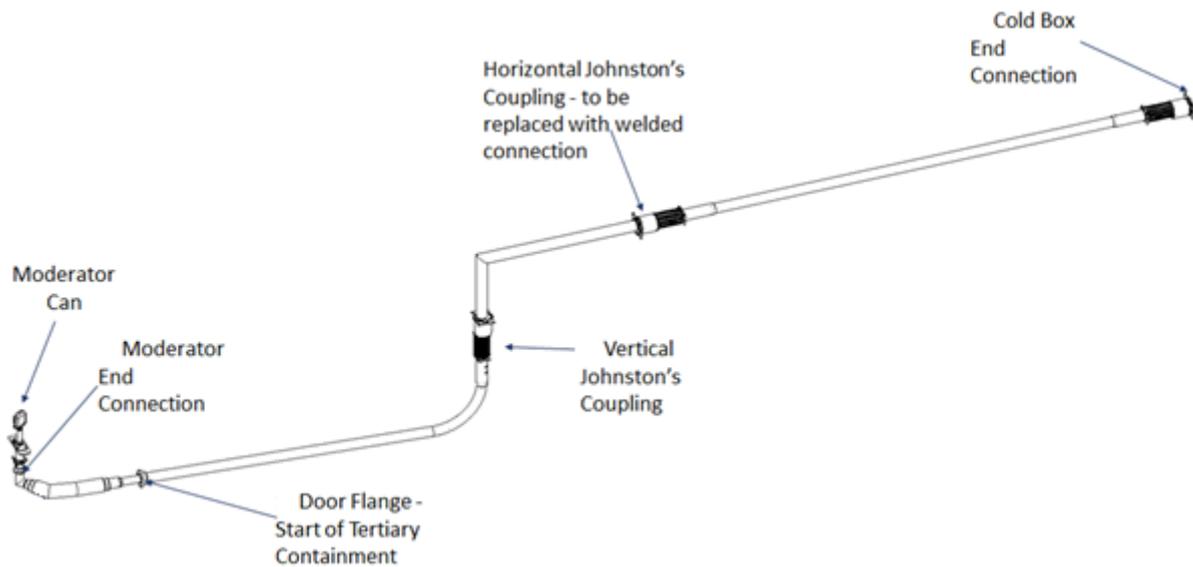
A view of the current methane transfer line assembly in isolation (other components and shielding not shown). The item to be cooled (Moderator Can) is shown but not part of this tender.
